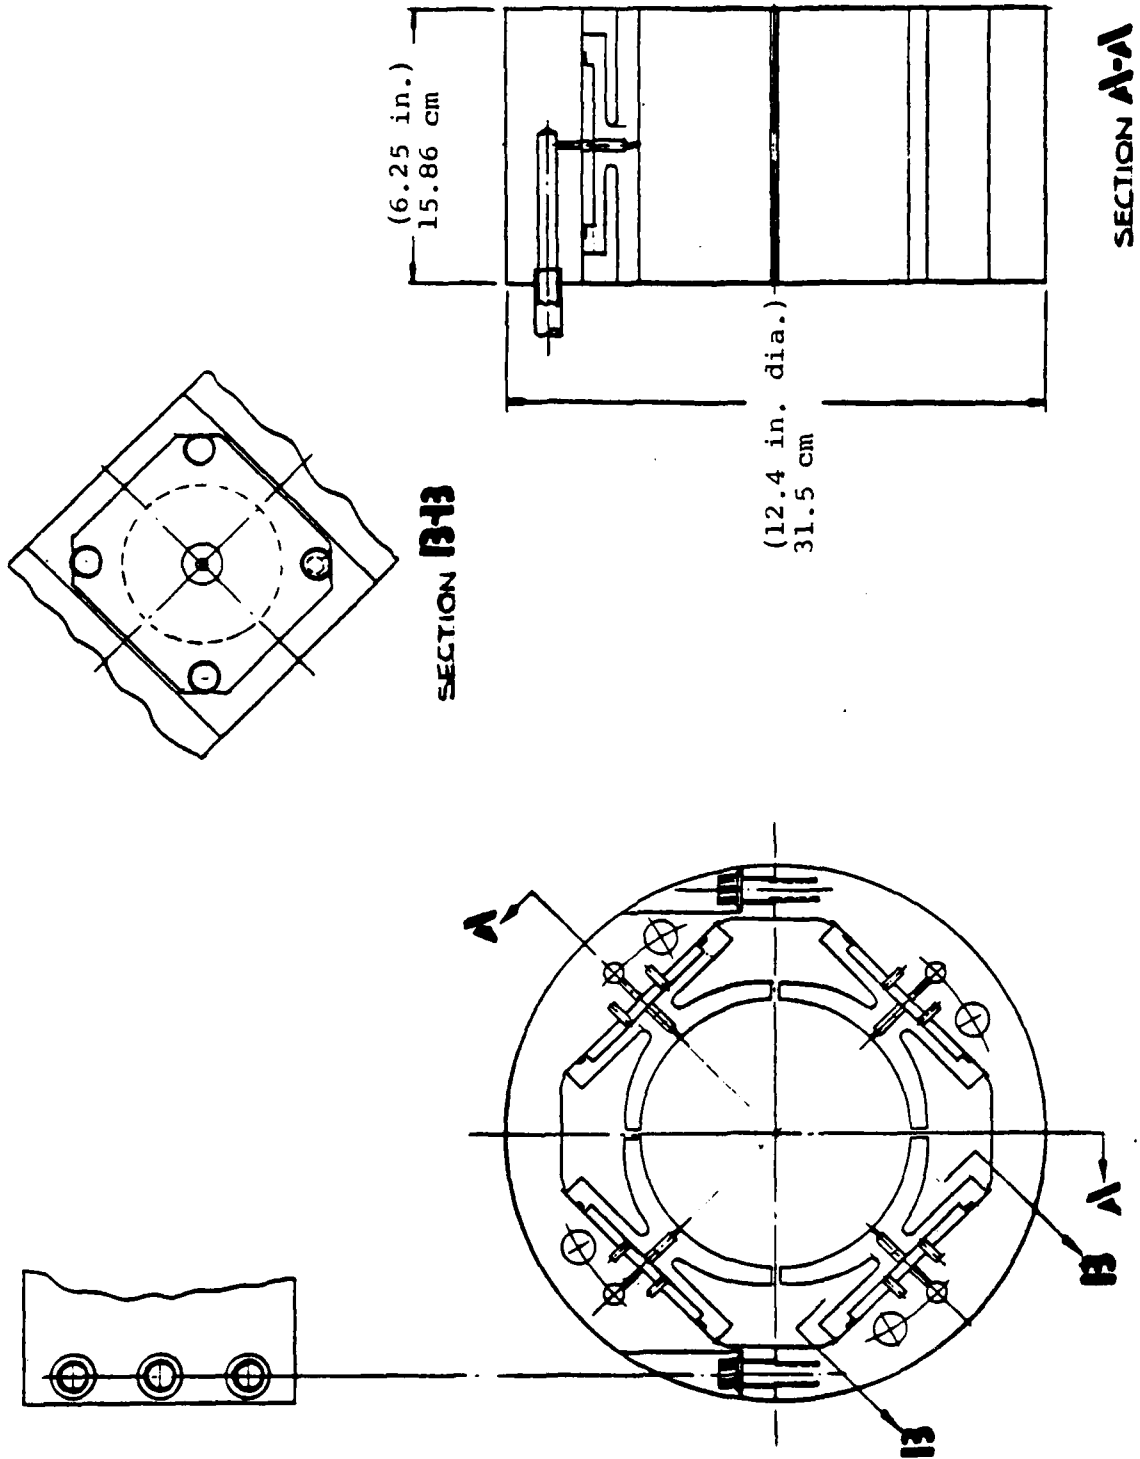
Hydrostatic Gas Journal Bearing Assembly for 15.88 cm dia. (6.25 in.) Shaft
